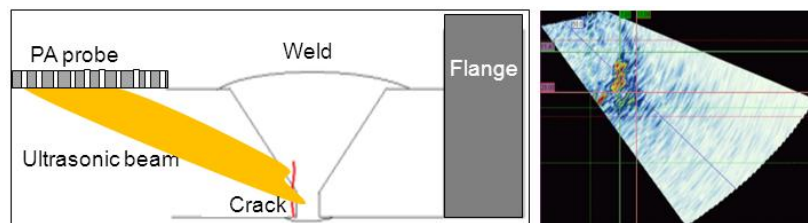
Schematic of crack in inner side of a flange weld (left), and example of the obtained S-scans showing detection and localization of this defect.
